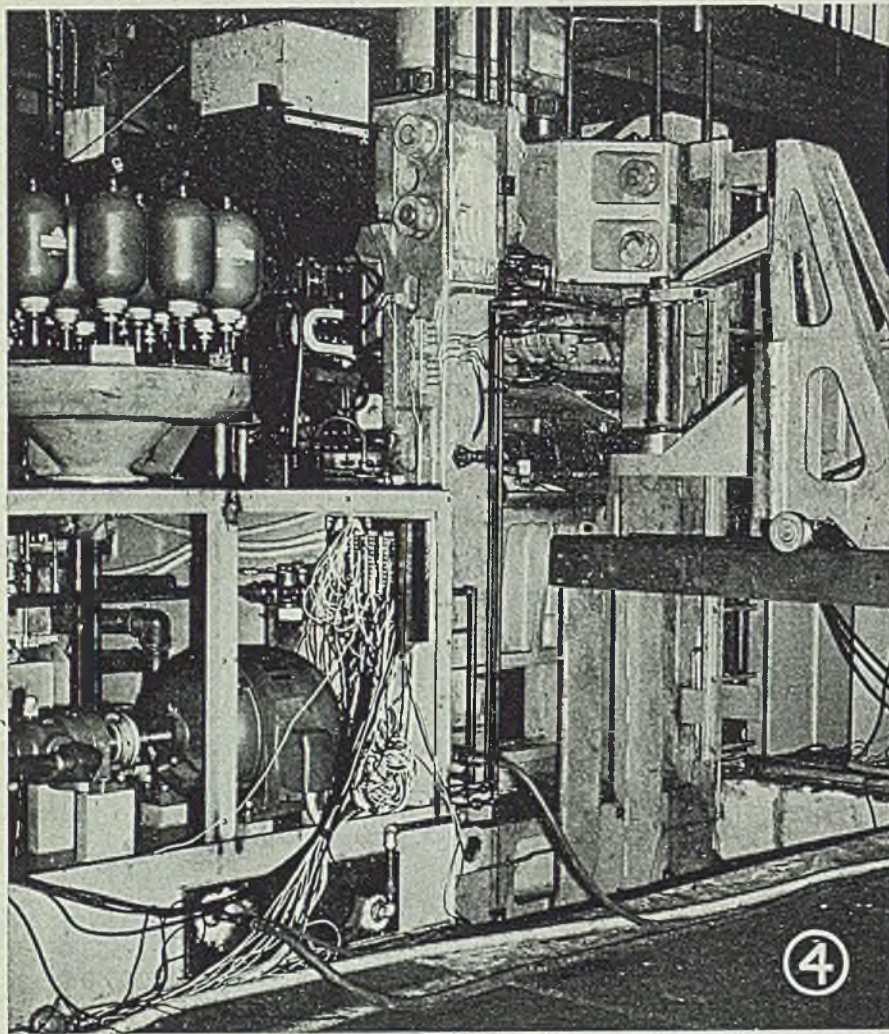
This rear view of the welder taken on Taylor-Winfield's assembly floor shows the hydraulic system at the left and the loading fixture at the right
